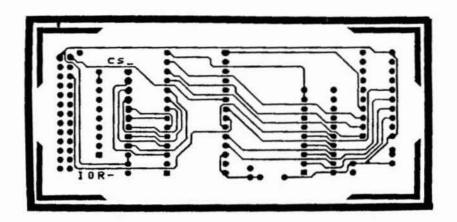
(c) Layout of PCB for data storage interface (solder side)
